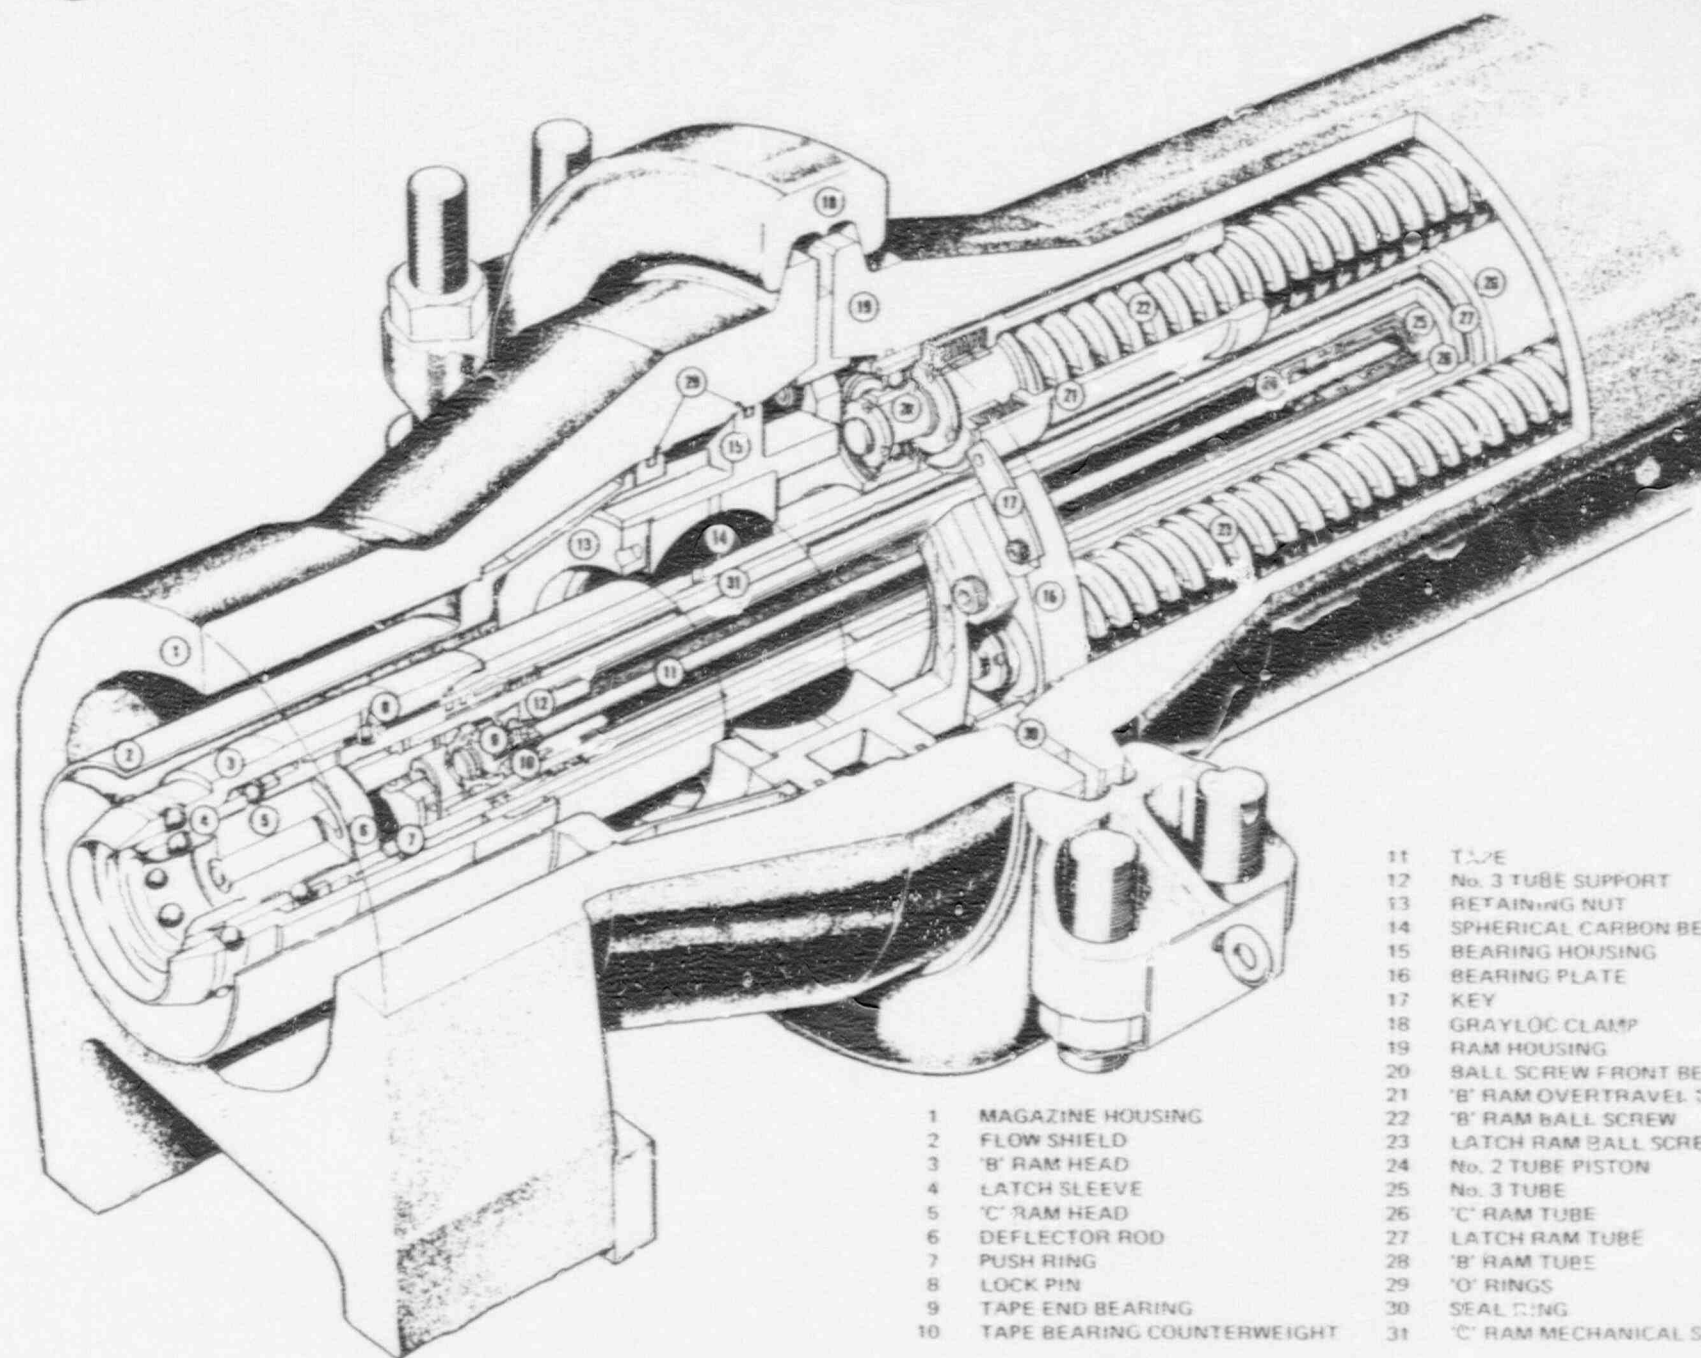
RAM ASSEMBLY - EXPLODED VIEW
